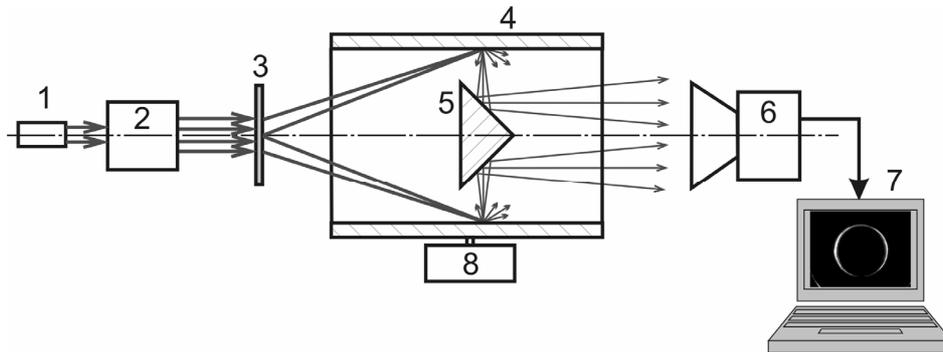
Principle of holes inspection by DOE: 1 – laser; 2 – collimator; 3 – DOE; 4 – object under inspection; 5 – conical mirror; 6 – CCD-camera; 7 – computer; 8 – device for detail moving.
